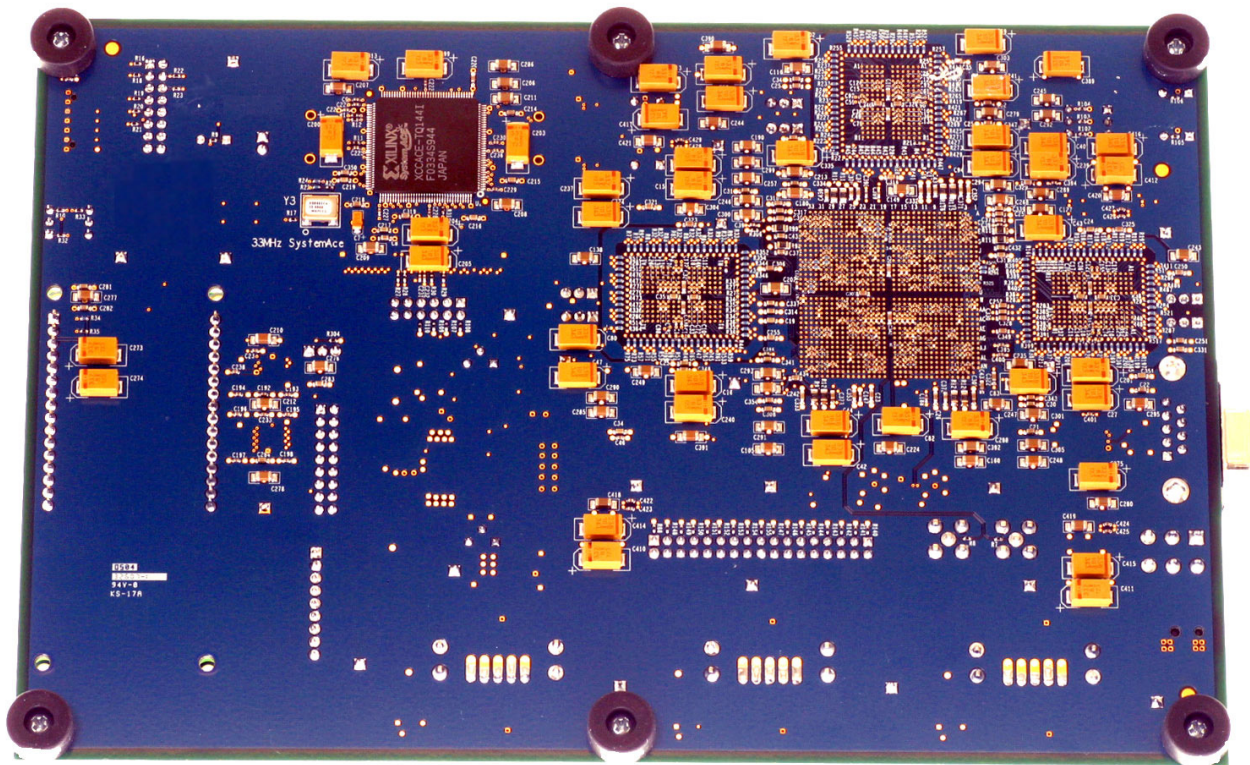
Picture of the Bottom Layer of the ML365 Revision 1.0b Board
